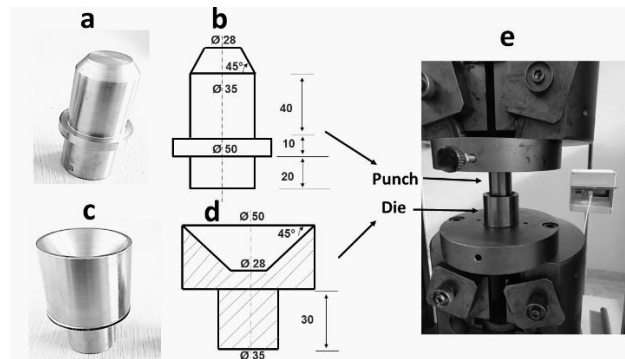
(a) Forging punch, (b) punch 2D view, (c) forging die (d) die 2D sectional view, and (e) forging setup.
